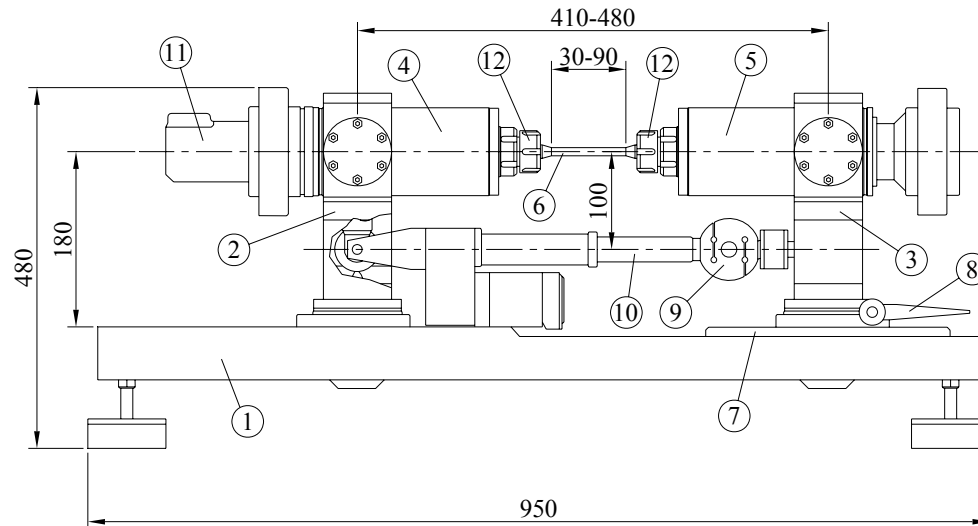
Rotating bending test machine: sketch showing the fundamental components [3.21].
